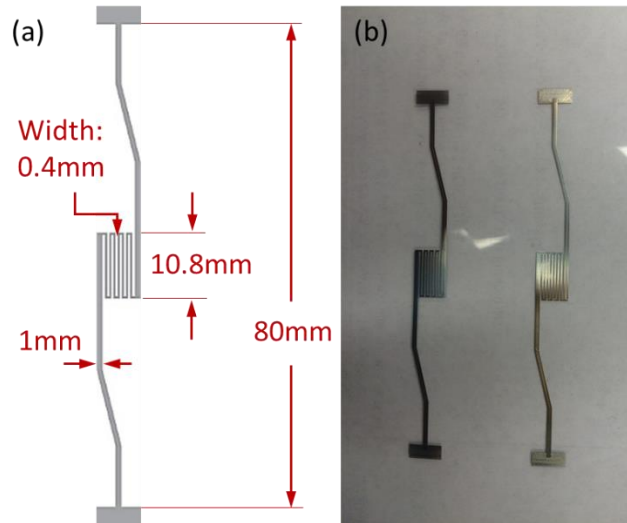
Printed strain sensors: a) dimensions; b) printed sensors on PFA film.
